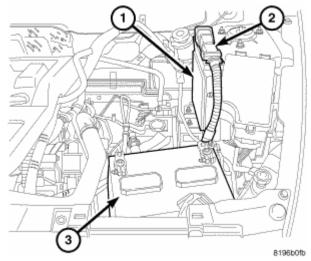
BATTERY Courtesy of CHRYSLER LLC
